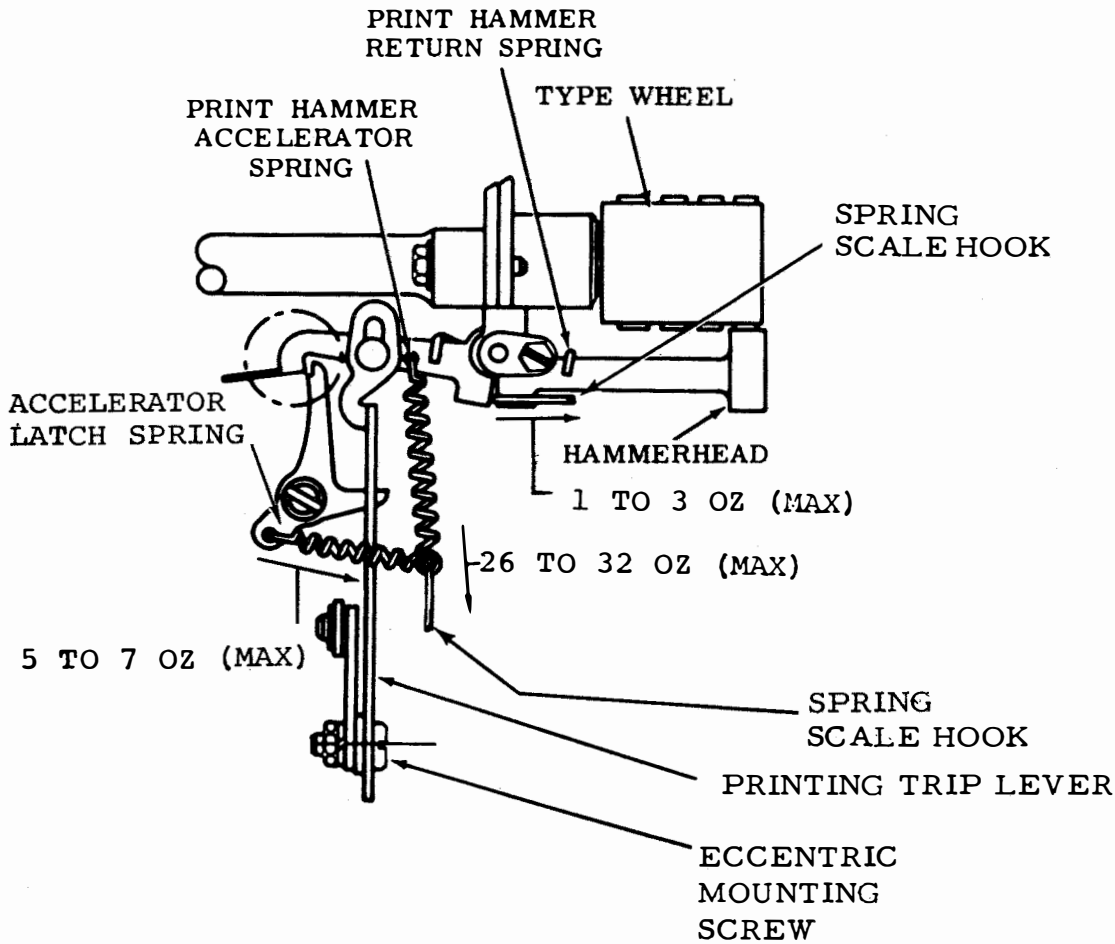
Print Hammer Return Spring, Accelerator Spring, and Accelerator Latch Spring, Left Side View
